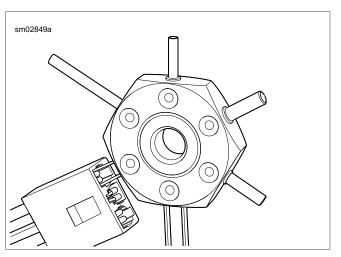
Removing Autofuse Unsealed Terminal from Ignition Switch
